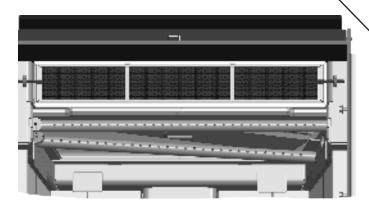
Remove the rear air tube by sliding to the right and pulling out.
